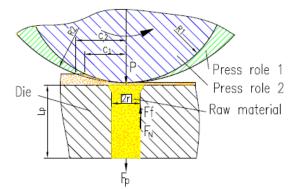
Roller diameter influence on contact surface between die and rolles *R1-roll diameter 1; R2- roll diameter 2; C1- the dimension of contact surface 1; C2-the dimension of consct surface 2.
